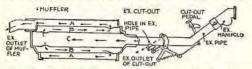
Sectional view of a muffler also showing how a "cut-out" is placed on the exhaust pipe.
